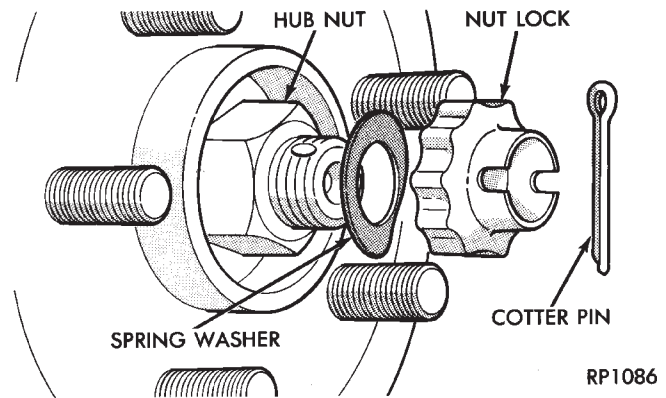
Cotter Pin, Nut Lock, and Spring Washer
